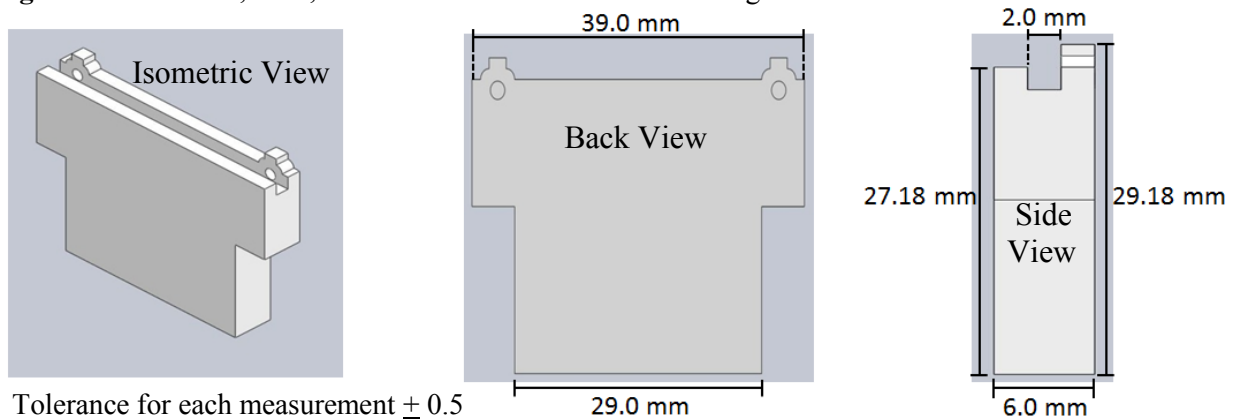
Isometric, side, and top views of the dovetail sliding mechanism.
